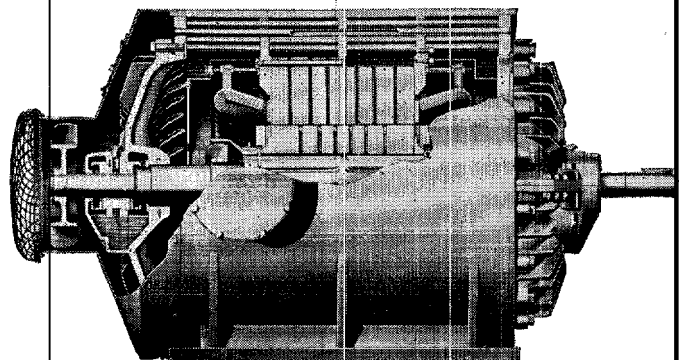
Tube-type cooling makes large totally-enclosed explosion-proof motors practical.
